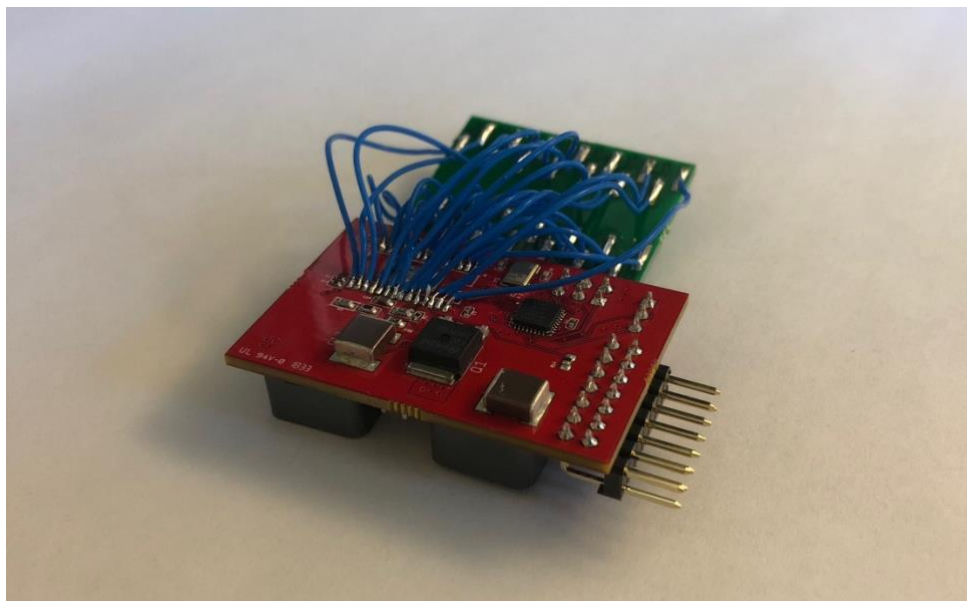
Adapter Board Manually Wired to Main Board with 30AWG Wire
